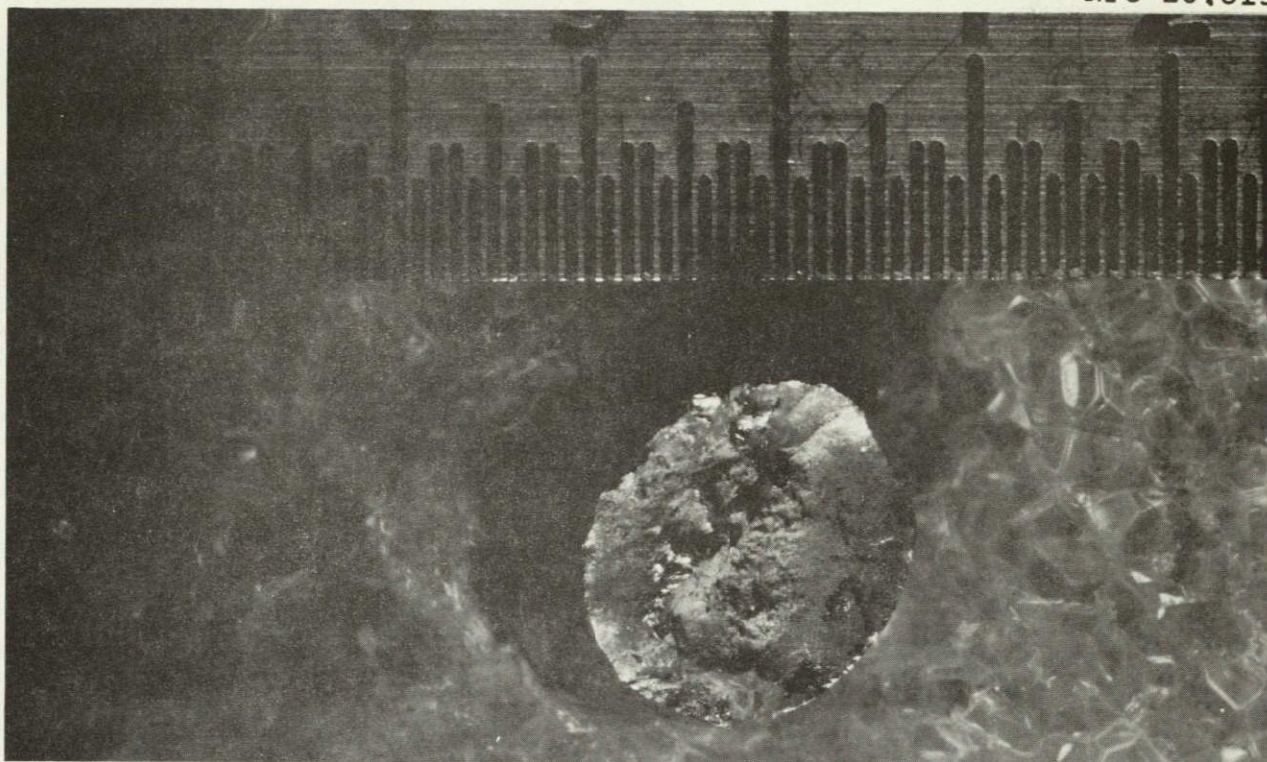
Macrograph (10X) of As-Welded Aluminum 7039-T61, Specimen AW-05: Irradiated at 140°R
